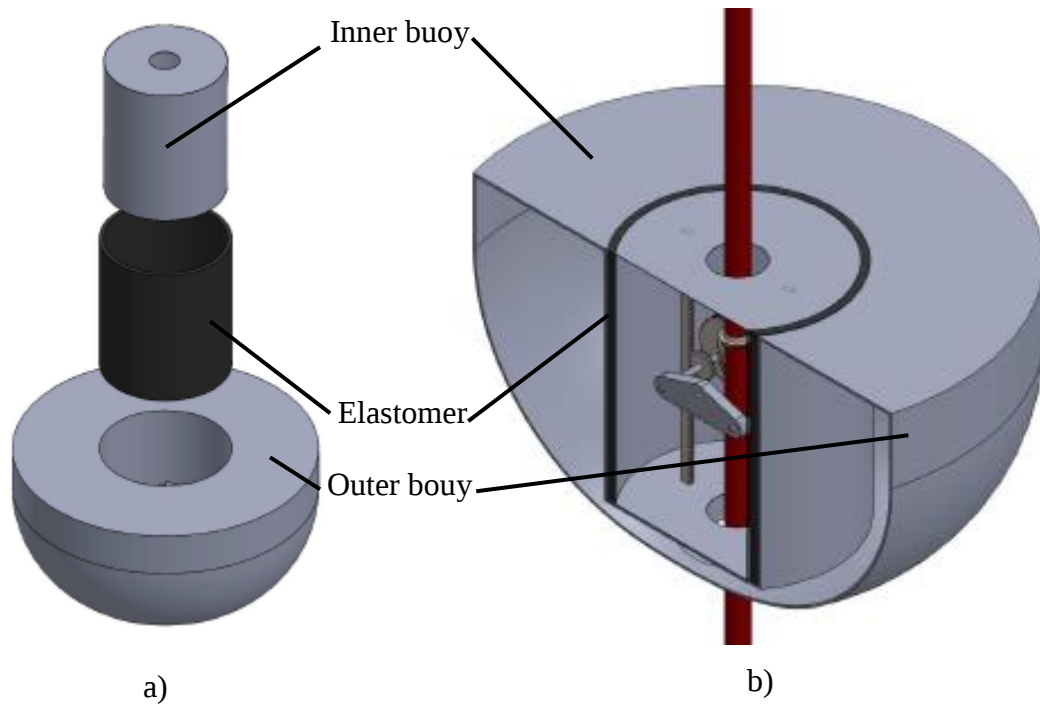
TRIPOWER UP component a) exploded view b) mechanism
